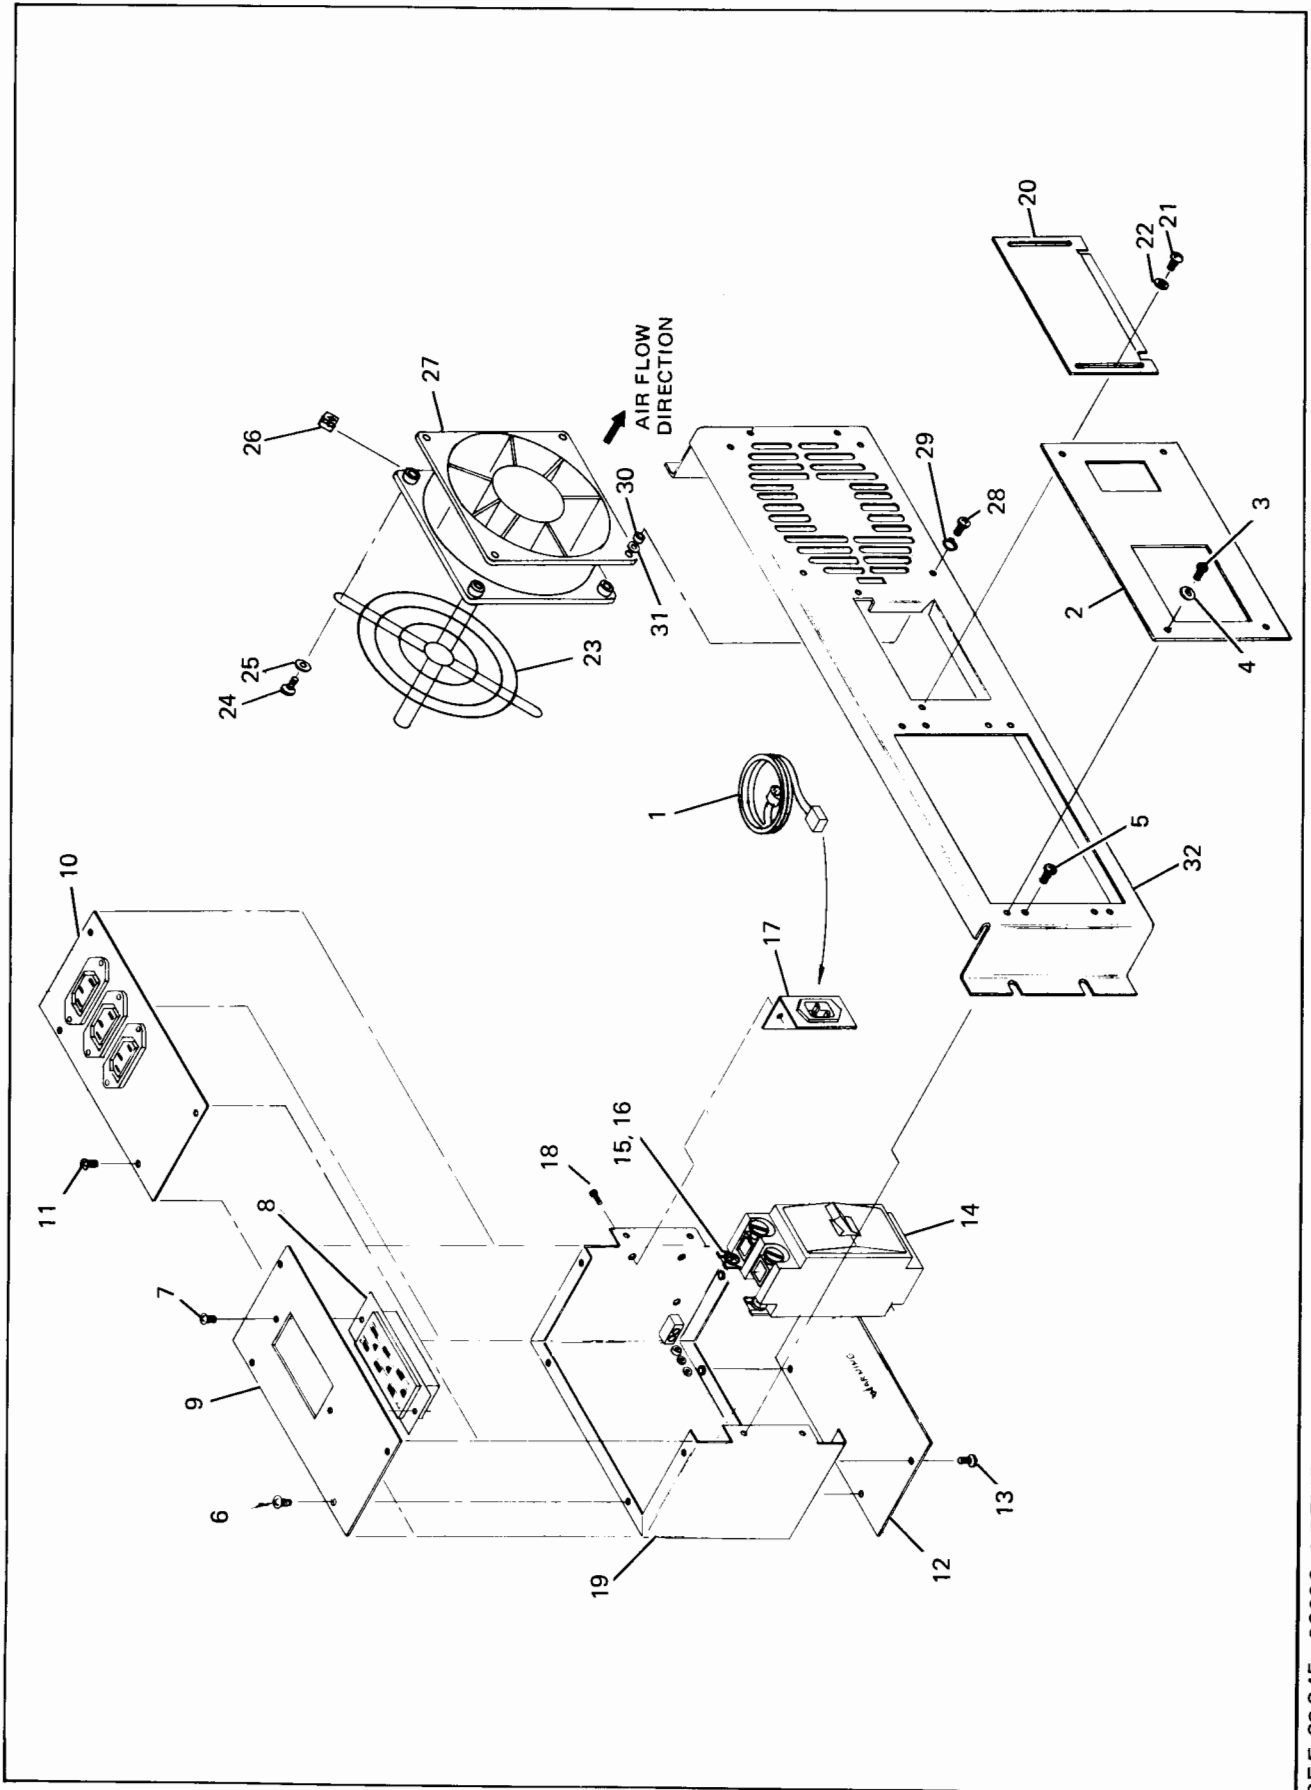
Power Panel Assembly (Part no. 29425-60003 and 29425-60004), Exploded View
